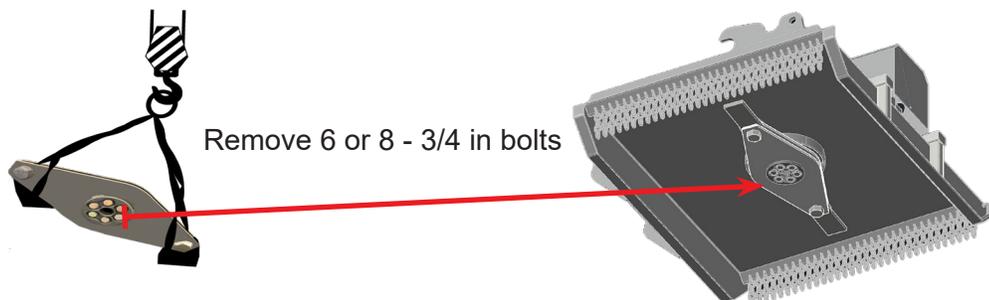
B BLADE HOLDER AND SLING SYSTEM
